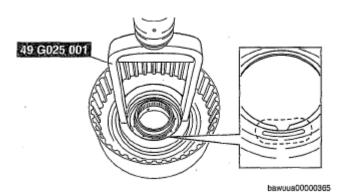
Placing SST On Clutch Balancer Courtesy of MAZDA MOTORS CORP.
